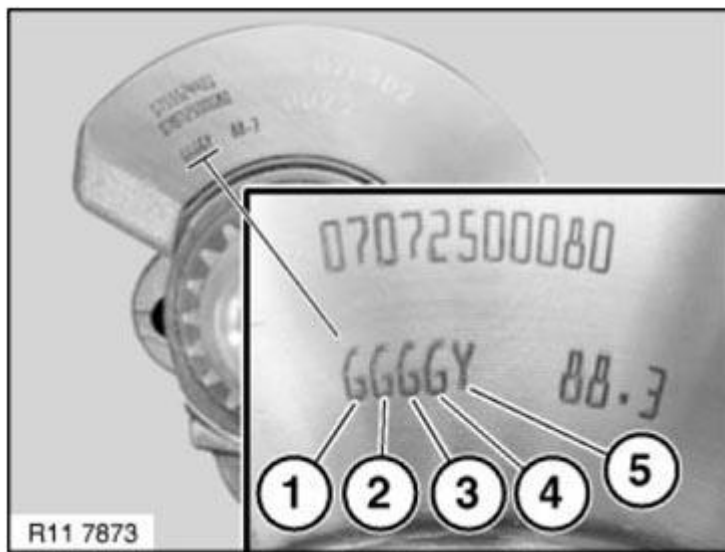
Identifying Color Assignment On Crankshaft 1 To 5
